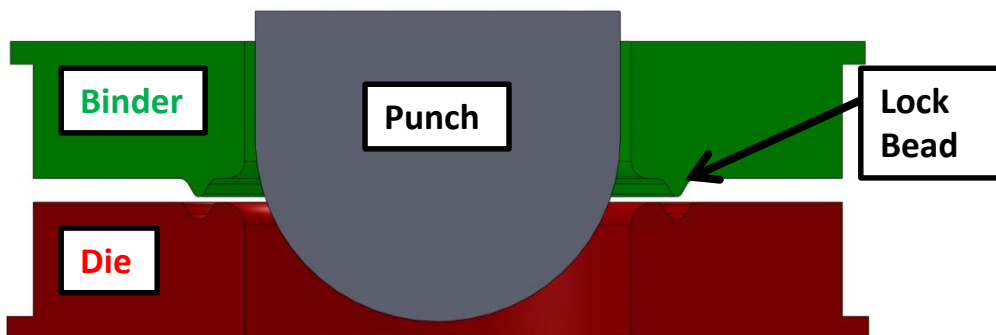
Dome test apparatus tooling components. Blank is placed between die and binder
